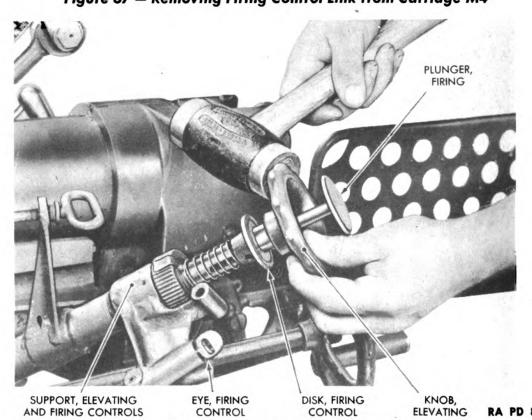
Removing Elevating Knob and Firing Plunger from Carriage M4
